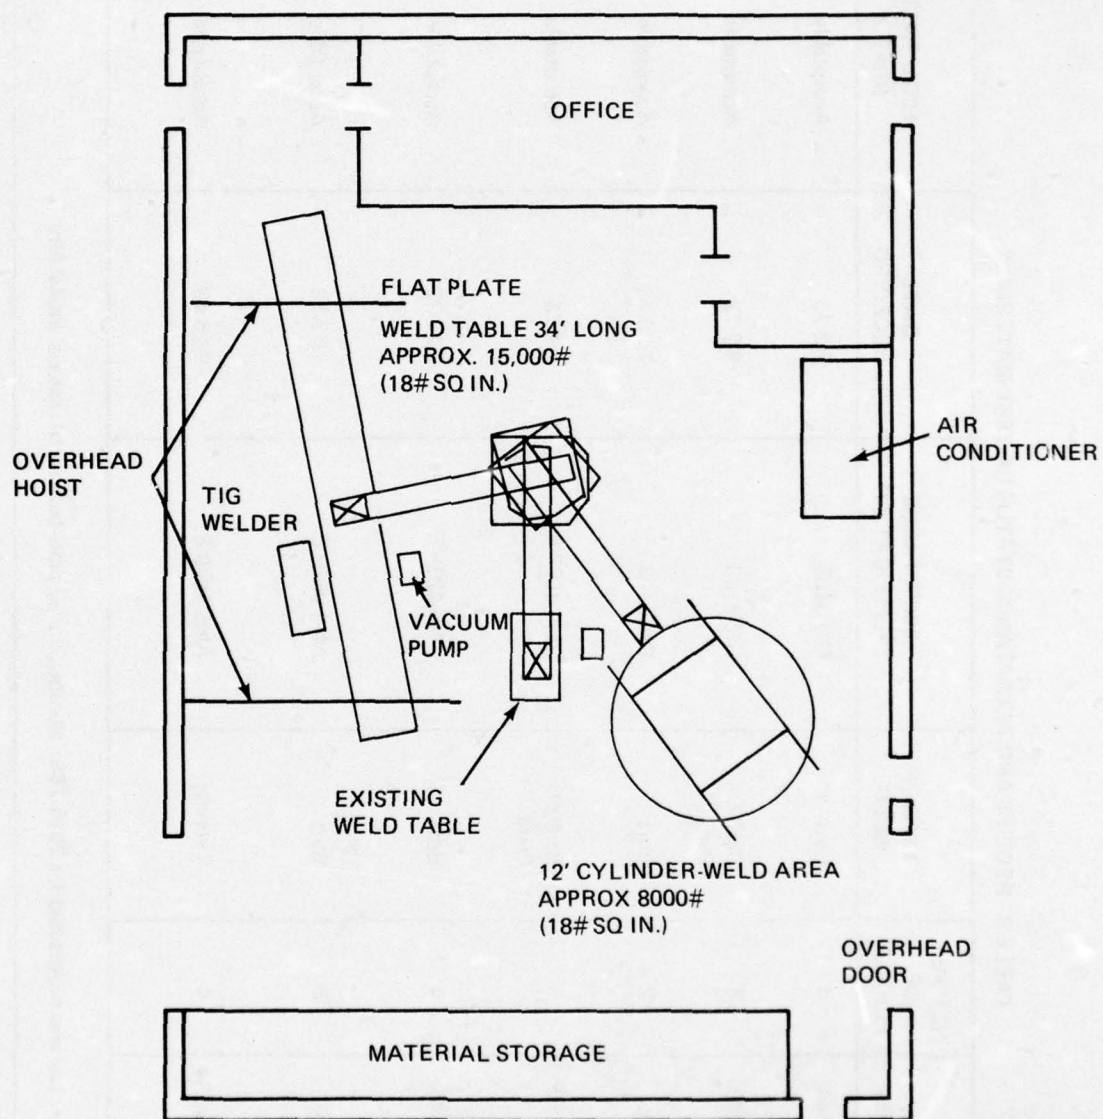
Sliding-Seal Electron-Beam Welding Area Layout
